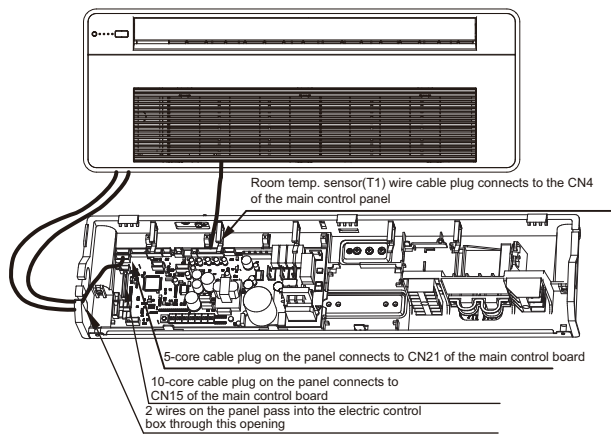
Electrical Wiring for Panel Assembly (015-024)
